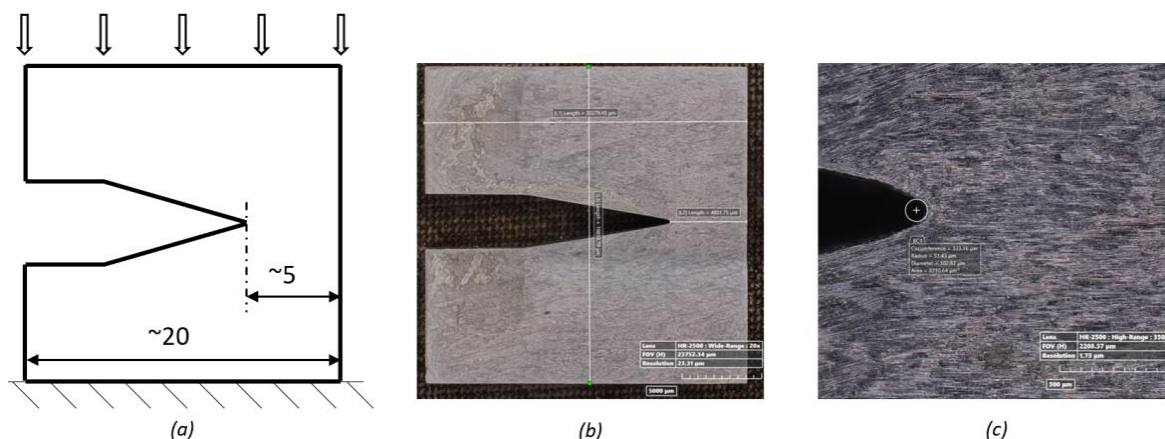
Small scale specimens manufactured: (a) nominal dimensions and loading scheme, (b) actual specimen microscopy with dimensions, (c) detail of the notch tip.
